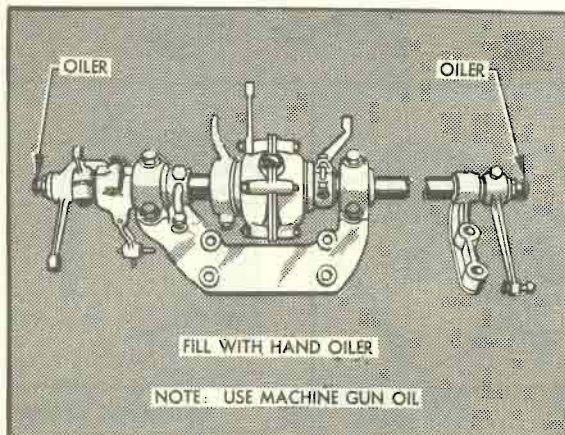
ENGINE CONTROL SHAFT LUBRICATION
